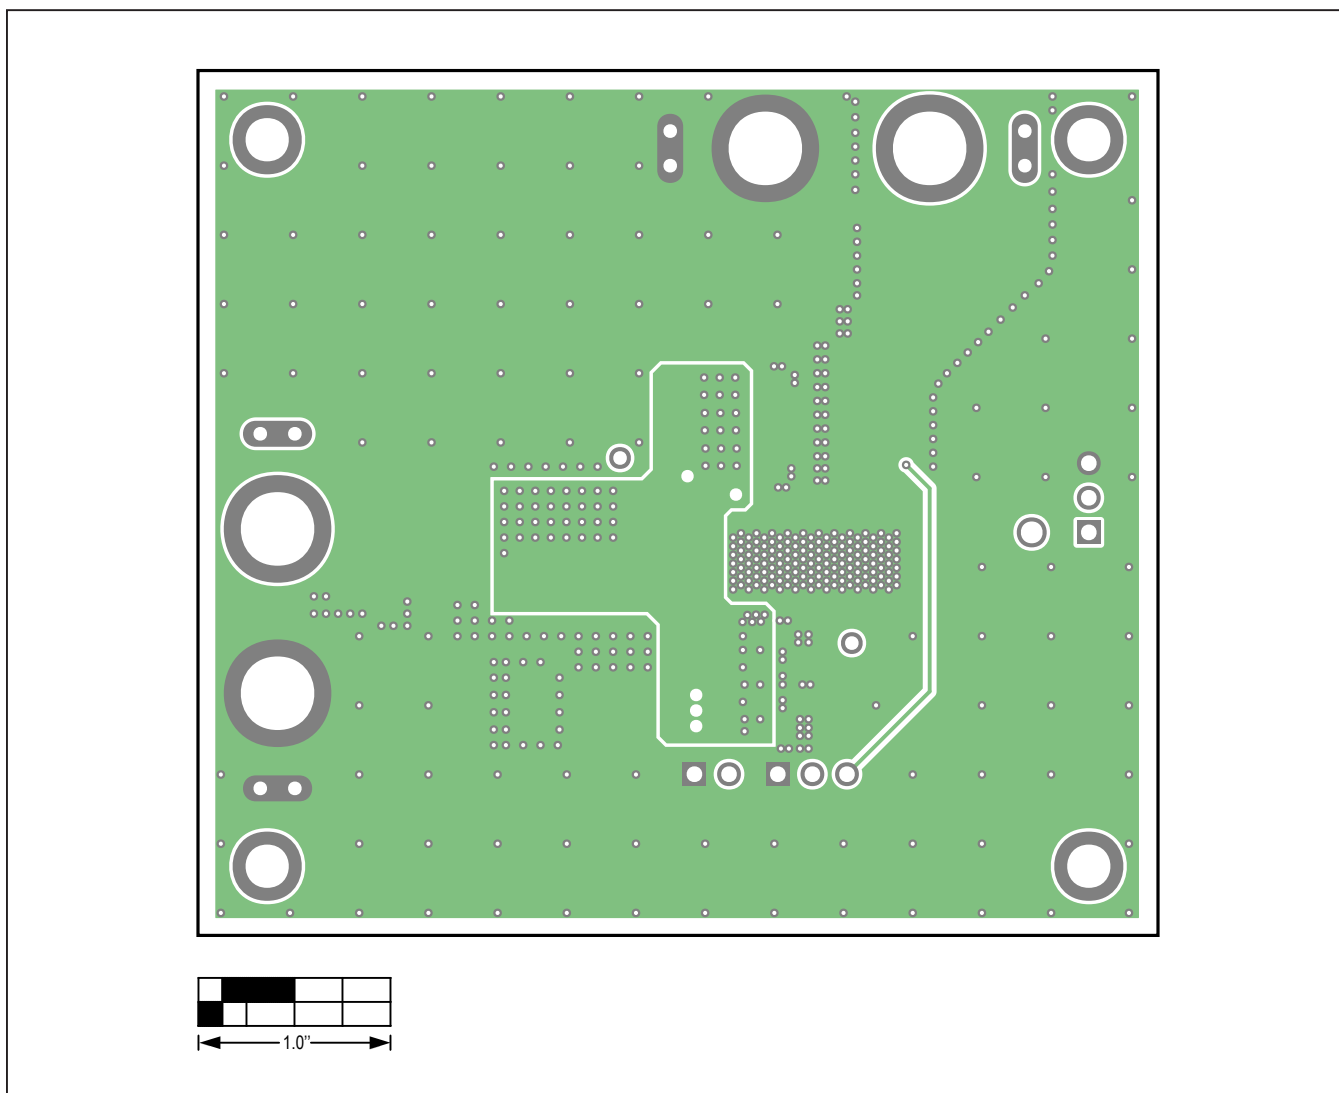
MAXM17546EVKITBE# 5V Output EV kit PCB Layout—Layer 3
